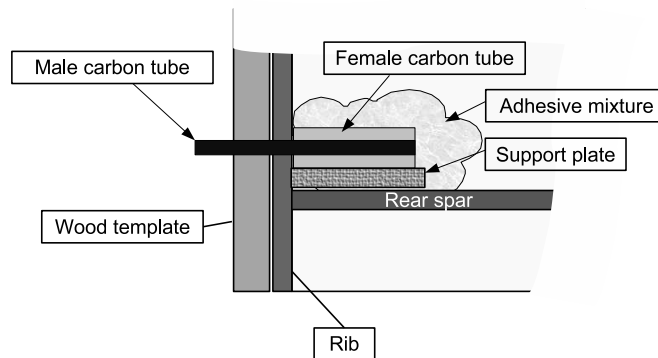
Positioning the tube assembly next to the rear spar (top view)
